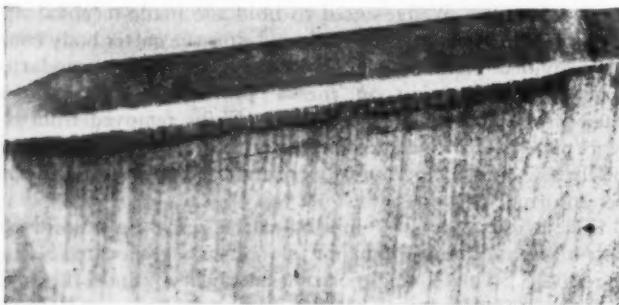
CUTTING TIP AT END OF TEST AT 582 FPM
